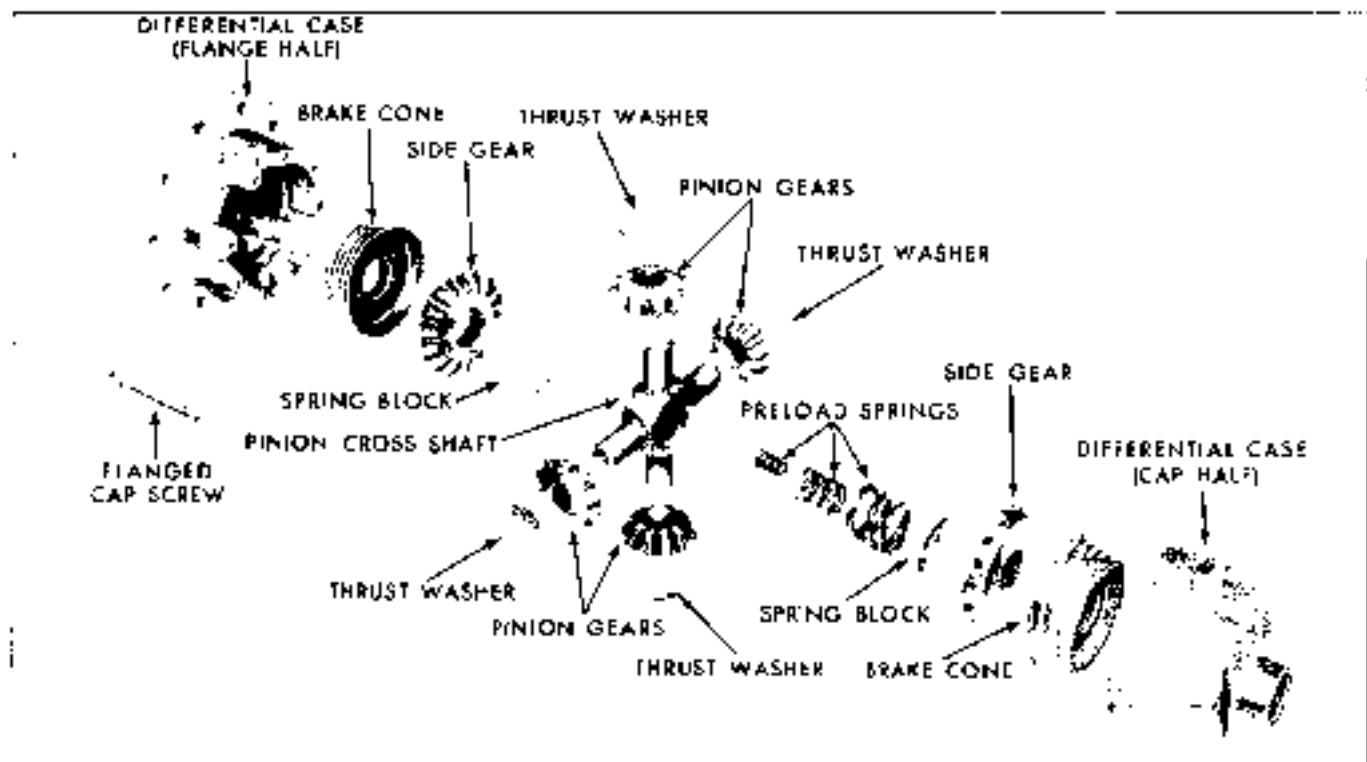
B-3 Exploded View of Pontiac and Ford 4 Pinion Safe-Track
